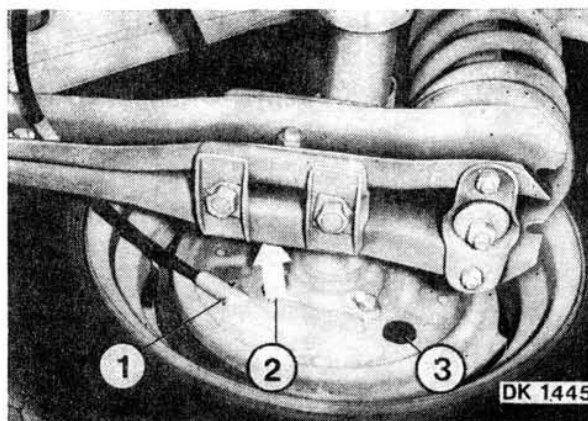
/2 - Backing Plate of Right-hand Rear Wheel Brake
